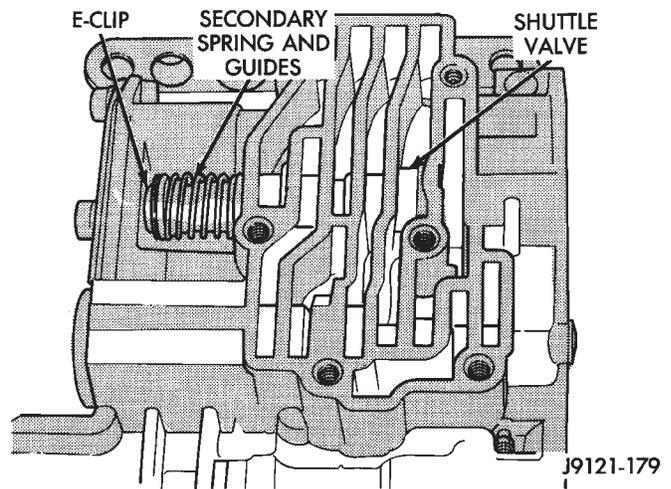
Shuttle Valve E-Clip And Secondary Spring Location
